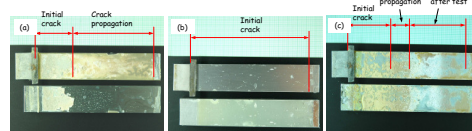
Fracture surfaces of test specimens after 30 days of exposure at 95% HR and 50°C: a) γ-APS b) γ-GPS c) γ-MPS
